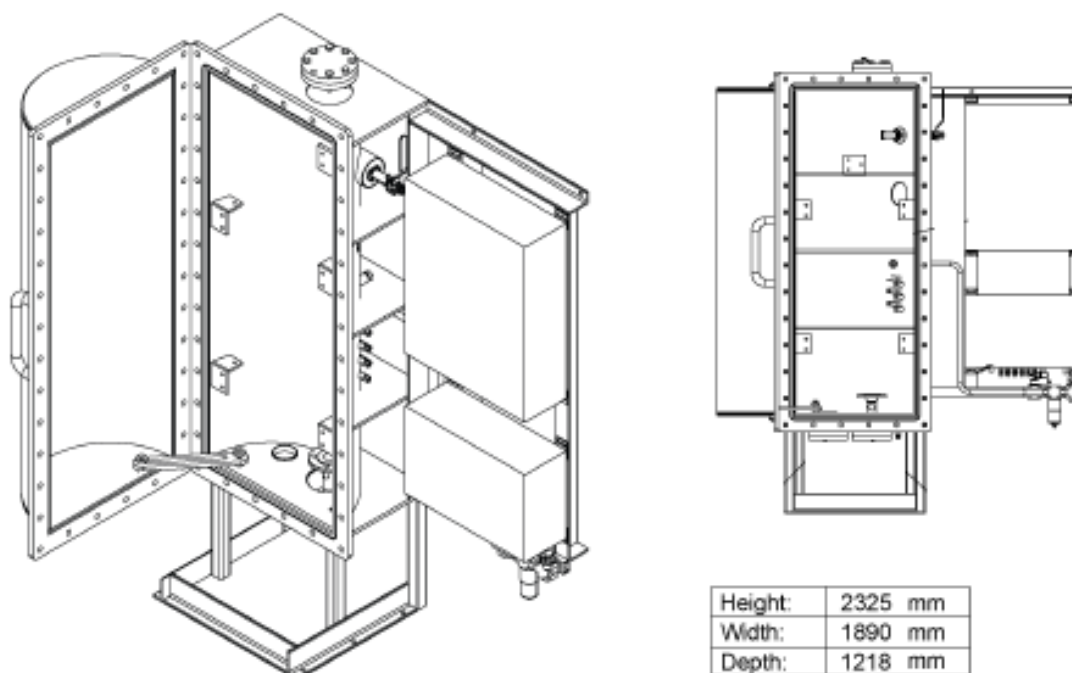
Dimensions of the Gas Valve Unit. Source: Wärtsilä
